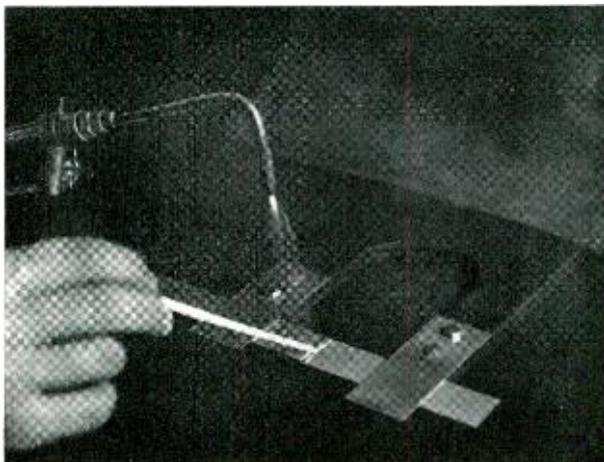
Applying the new soldering technique to two beveled surfaces. The oxy-hydrogen torch shown is only one of a number of common torches that may be used for this type of soldering.
